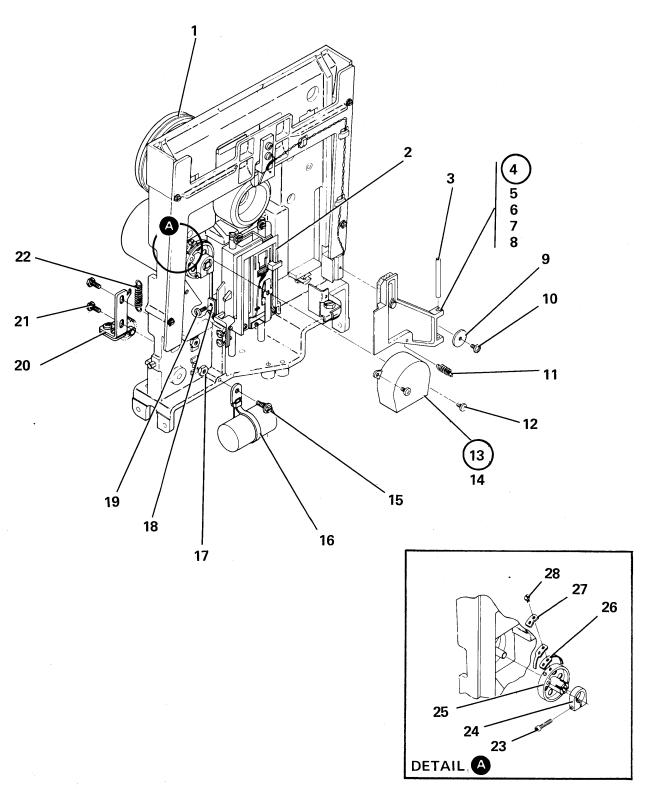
BASE PLATE ASSEMBLY. SEE LIST 17.
